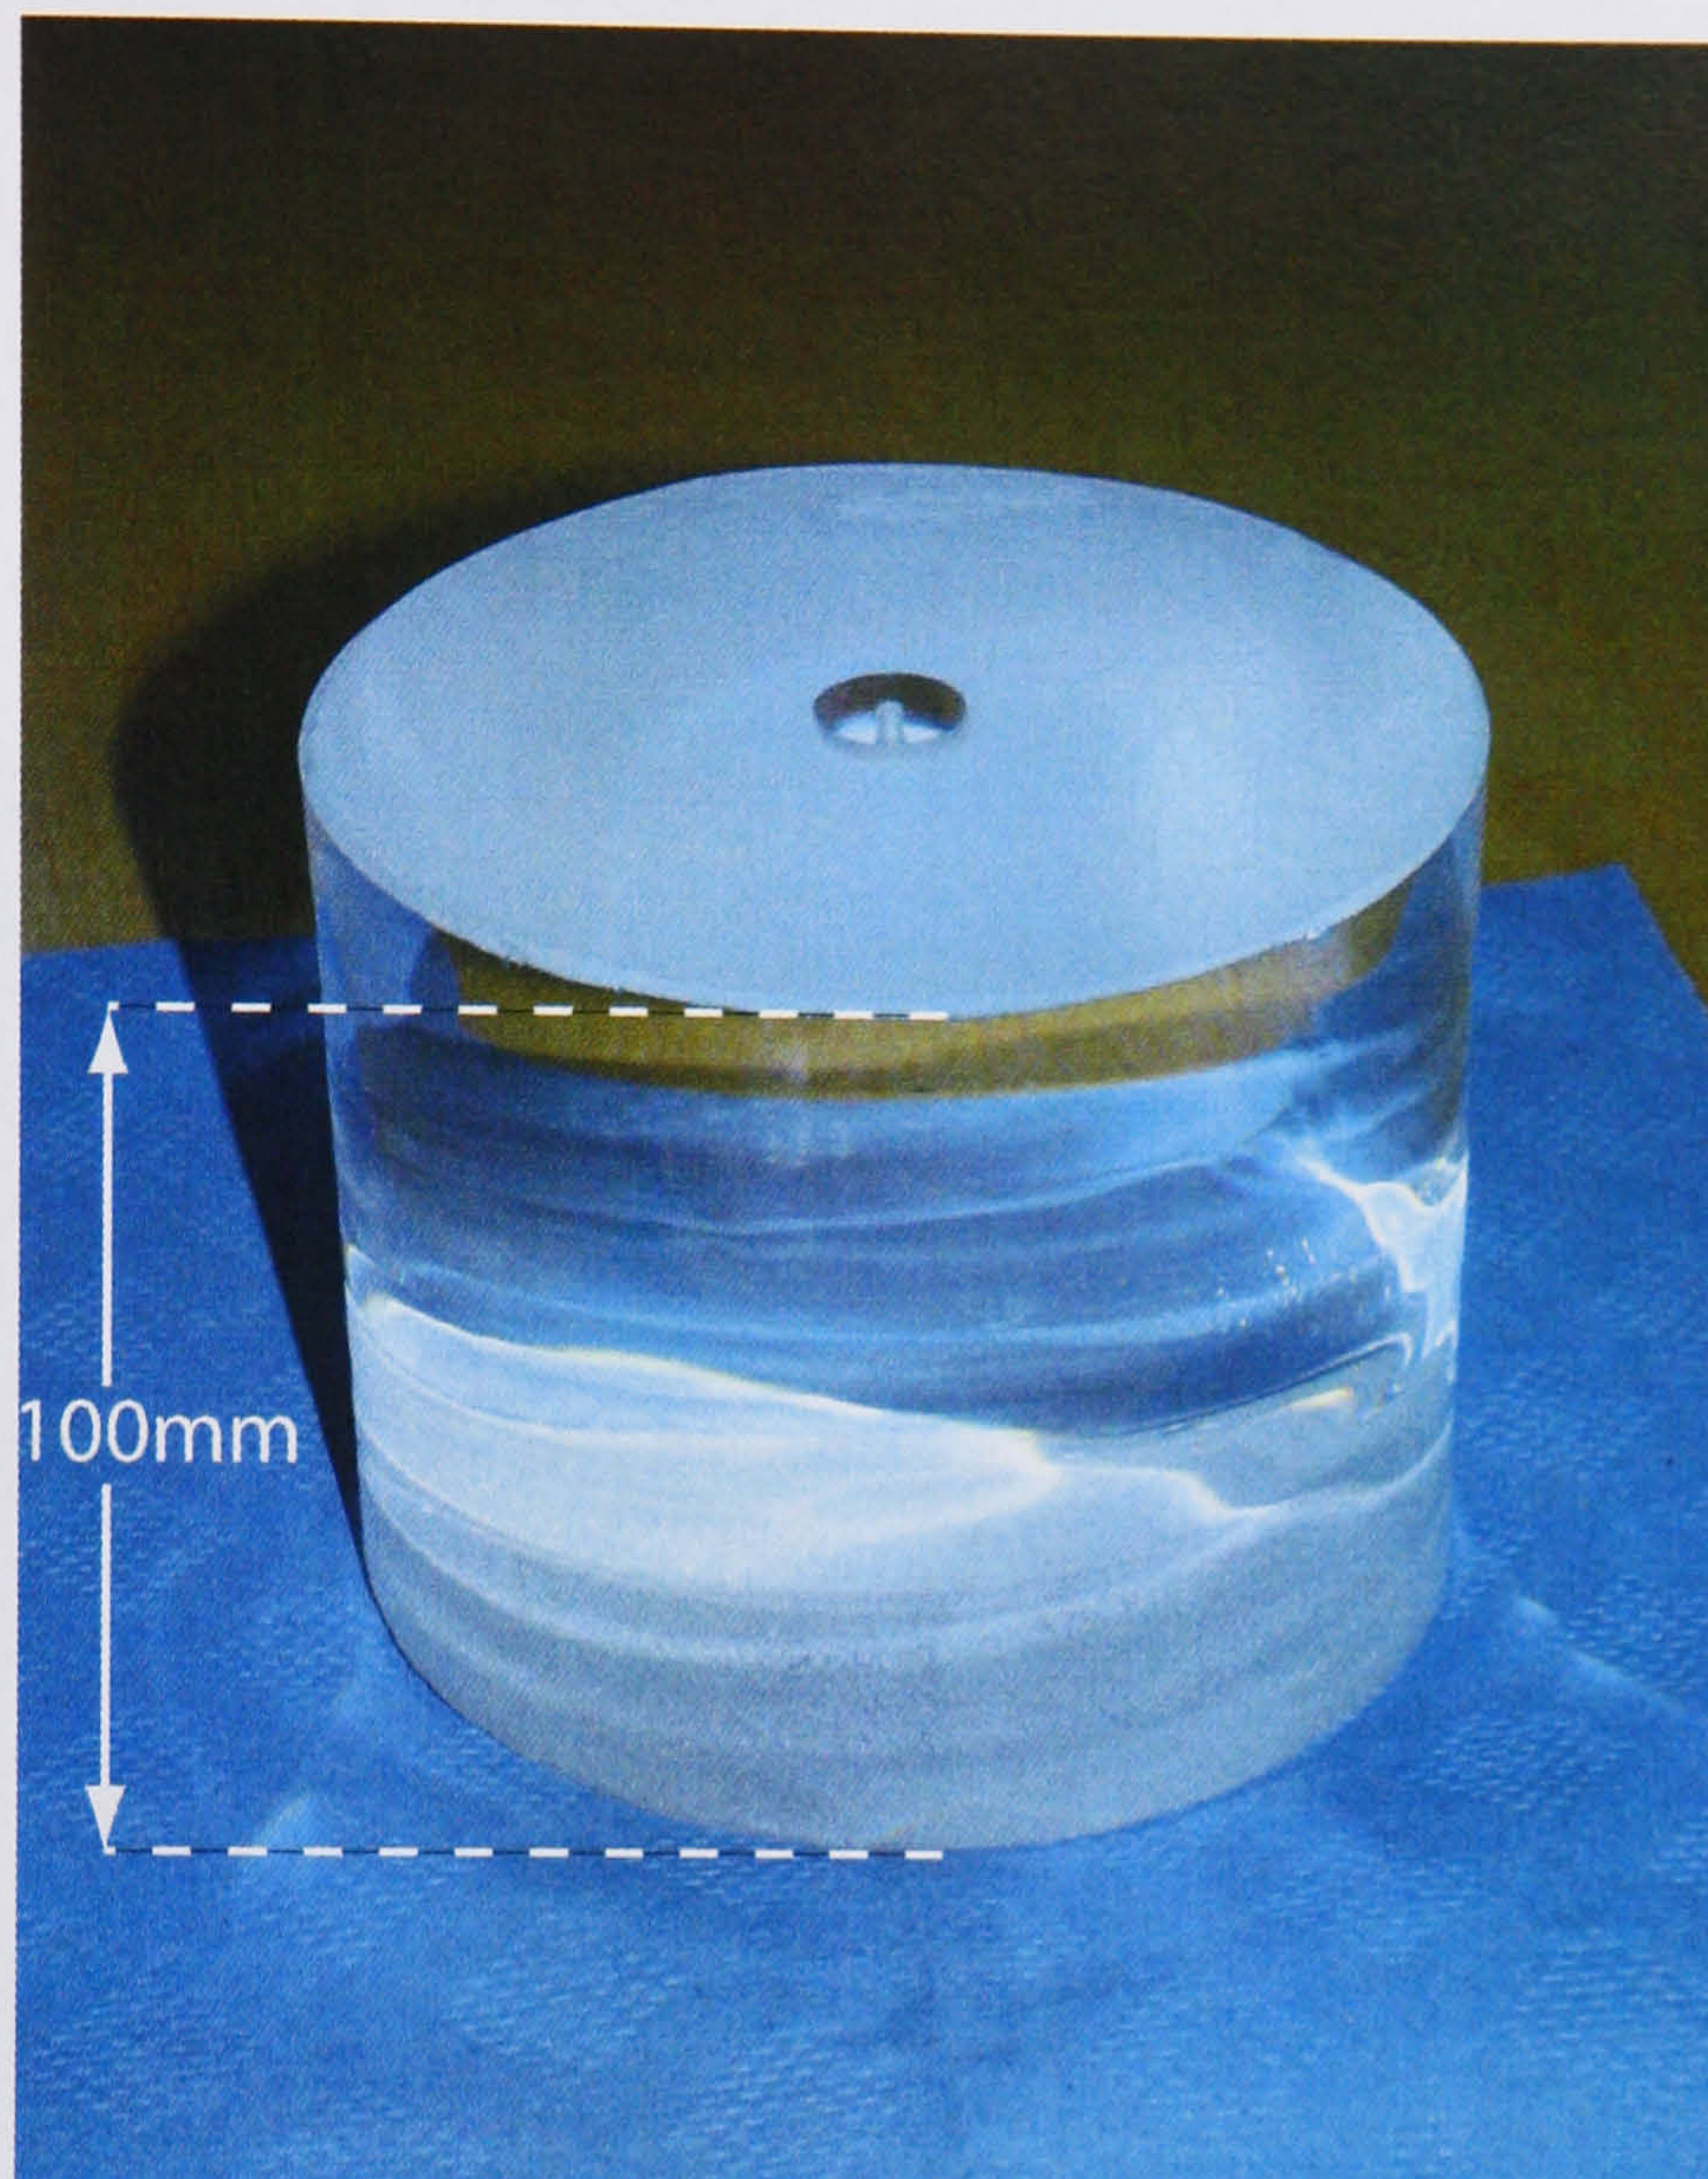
2.4kg HOQ grade fused silica lower mass with attachment pin ground into top surface by machining using a brass grinding tool and carborundum grit.
